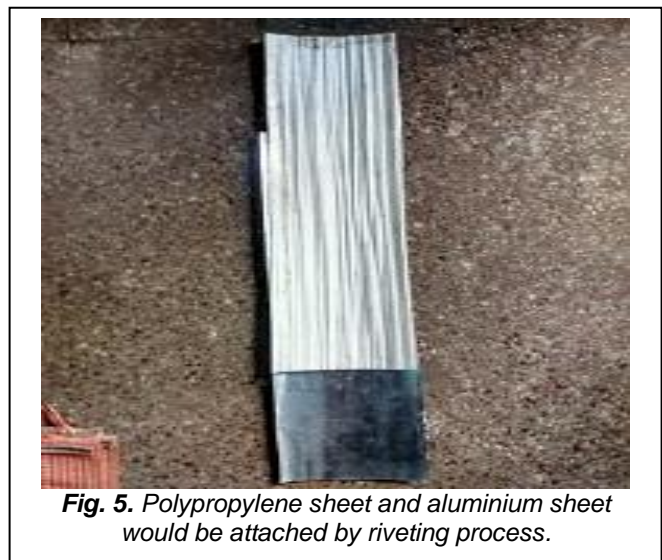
Polypropylene sheet and aluminium sheet would be attached by riveting process.
